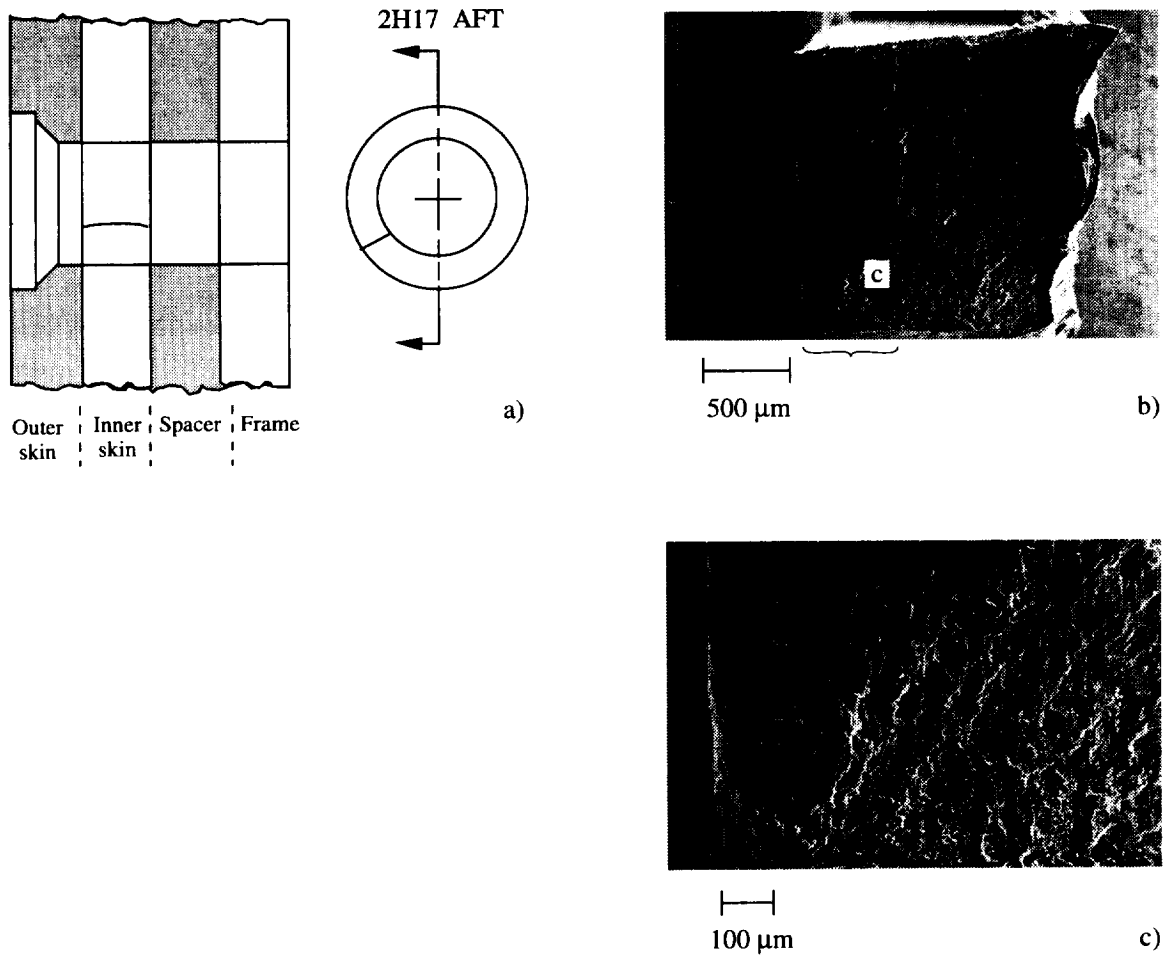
a) The schematic shows the rivet hole 2H17 configuration and the location of the inner skin fatigue crack oriented in the aft direction and below the 9 o'clock position. b) The SEM micrograph shows the inner skin fatigue crack fracture surface (the direction of crack propagation is from the bottom to the top of the figure). The rivet hole is located at the bottom of the micrograph. The fatigue crack was cut during the removal of the specimen from the panel and a portion of the fatigue crack surface is not shown in the figure. c) The SEM micrograph shows the fatigue crack surface at the outboard corner (approximate crack initiation site) of the rivet hole, region "c" in Figure 7.31.b.
